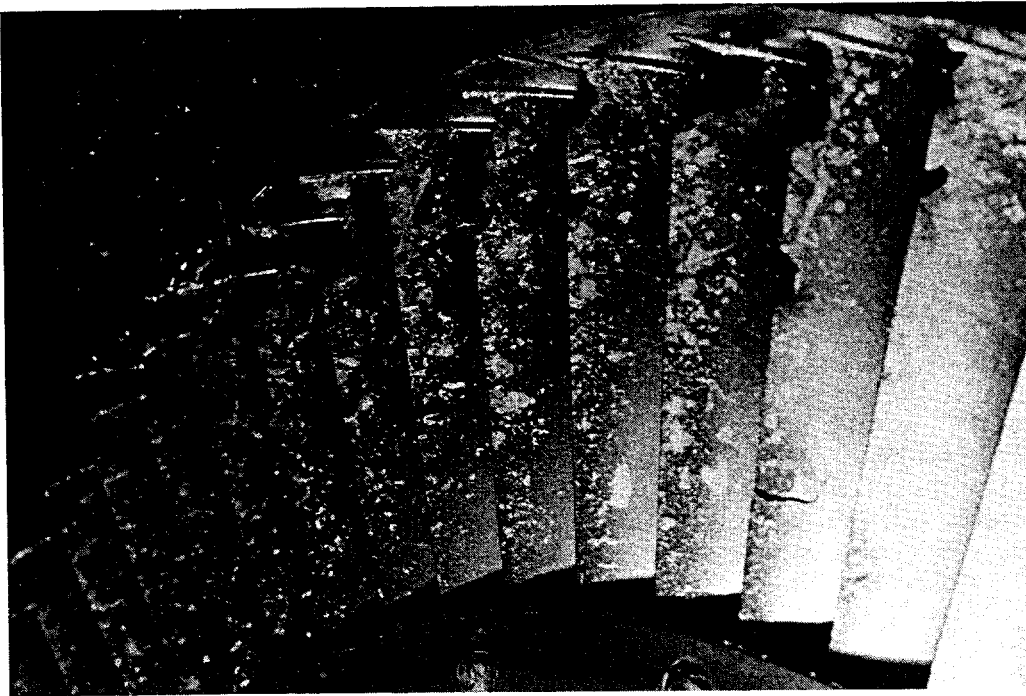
DAMAGED LP NOZZLE GUIDE VANES
